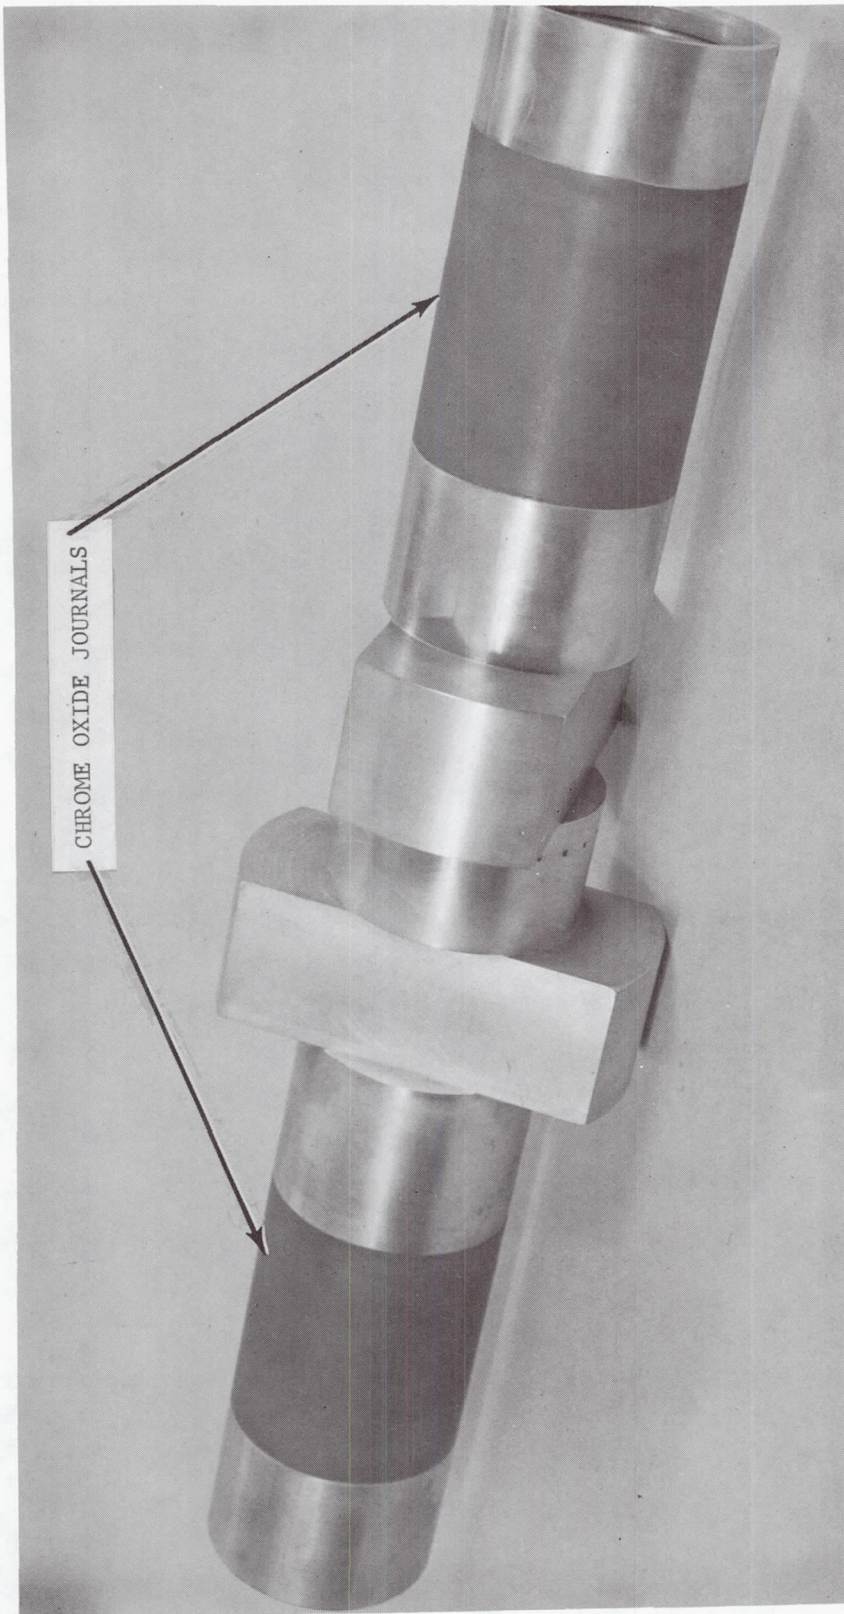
View of Rotor for Initial Rotor-Bearing Simulator
